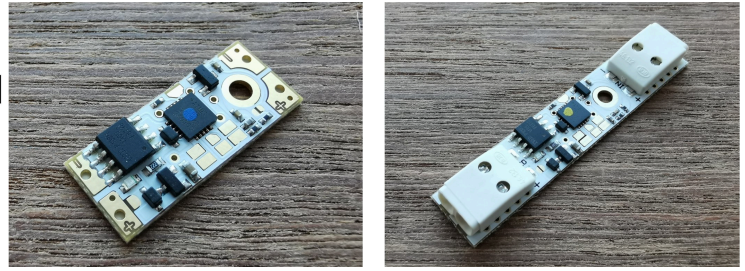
Soldering (L4ETD5), With terminal blocks (L4ETD5C)
